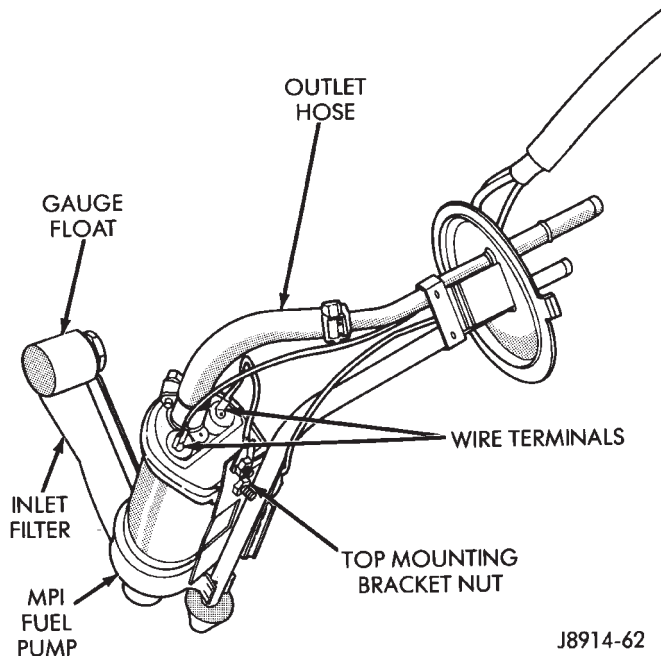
Fuel Pump Module—XJ Models—Disassemble/Assemble
